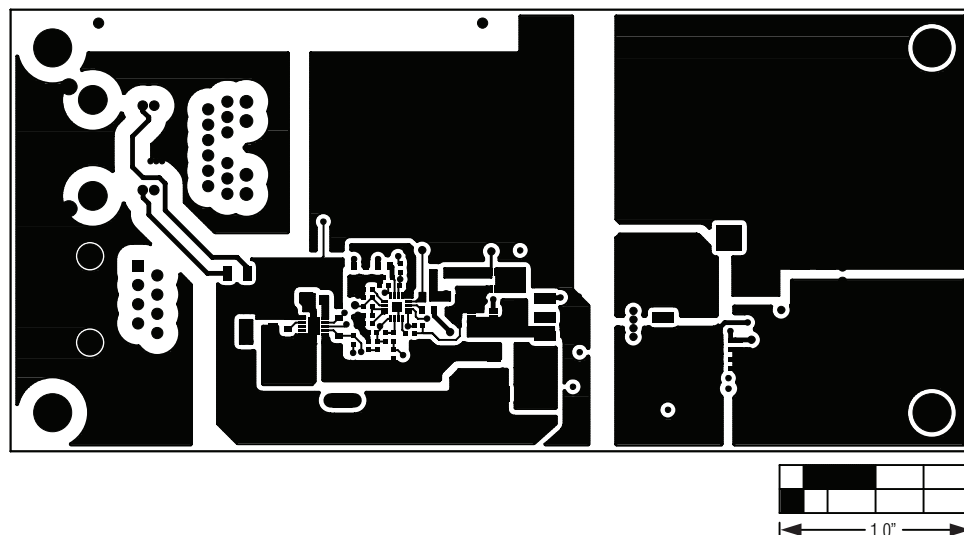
MAX5974C EV Kit PCB Layout—Component Side
